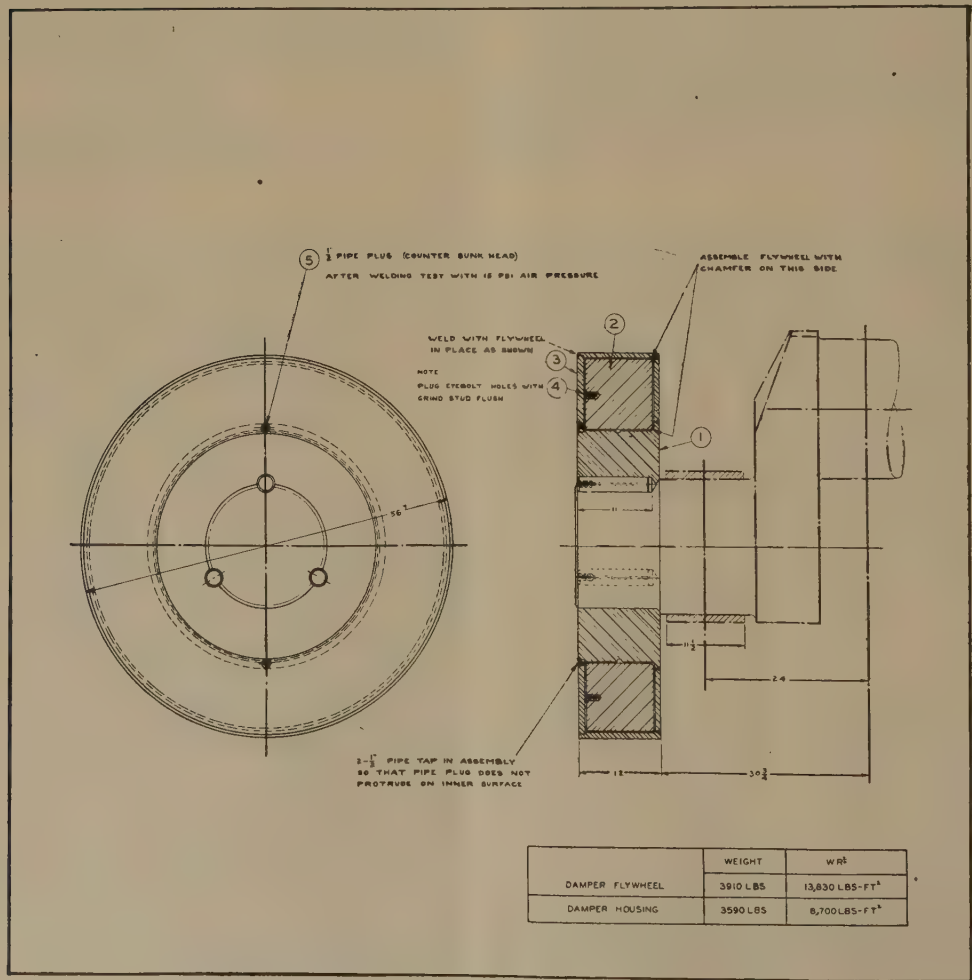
ASSEMBLY OF 56-IN-DIAM DAMPER
